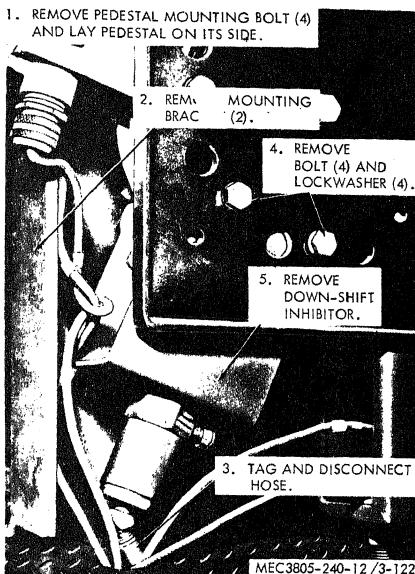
Down-shift inhibitor assembly, removal and installation.
